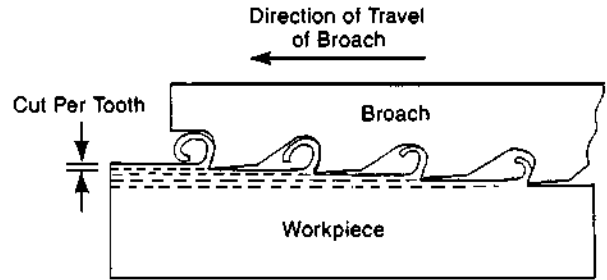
F The cutting action of a broach. (Drawing courtesy J. R. Casey Bralla.)
